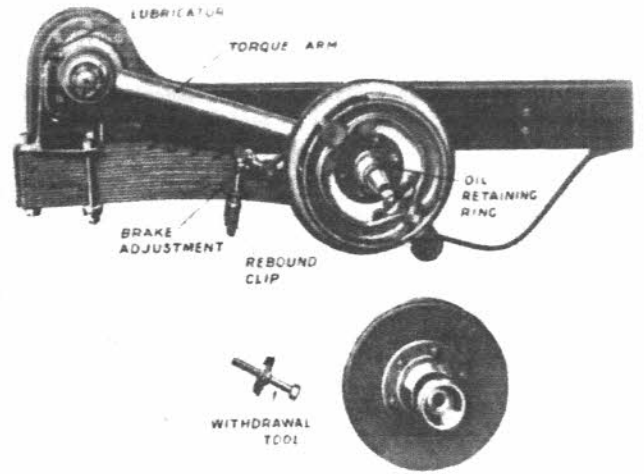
Front-Wheel-Drive Car, Rear Suspension, 1928
